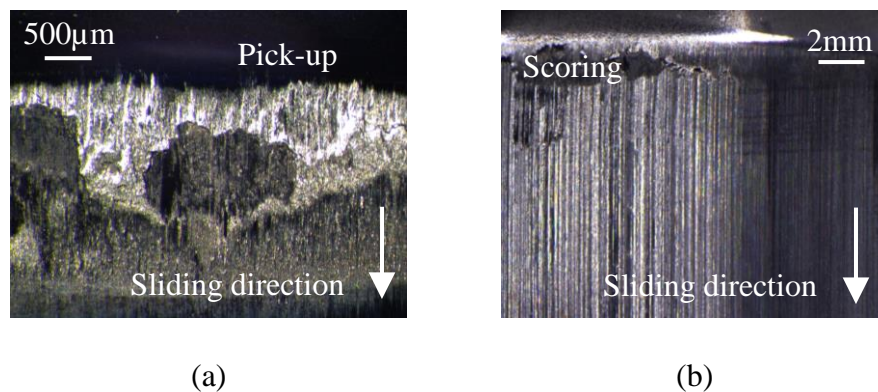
a) Pick-up of workpiece material on the tool surface, and b) scoring on the workpiece surface.
